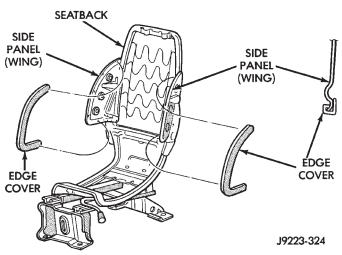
Side Panel (Wing) Edge Cover Installation—Wingback Seat
